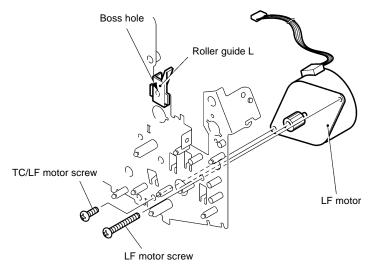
Disassembling the Left Side of the Chassis
